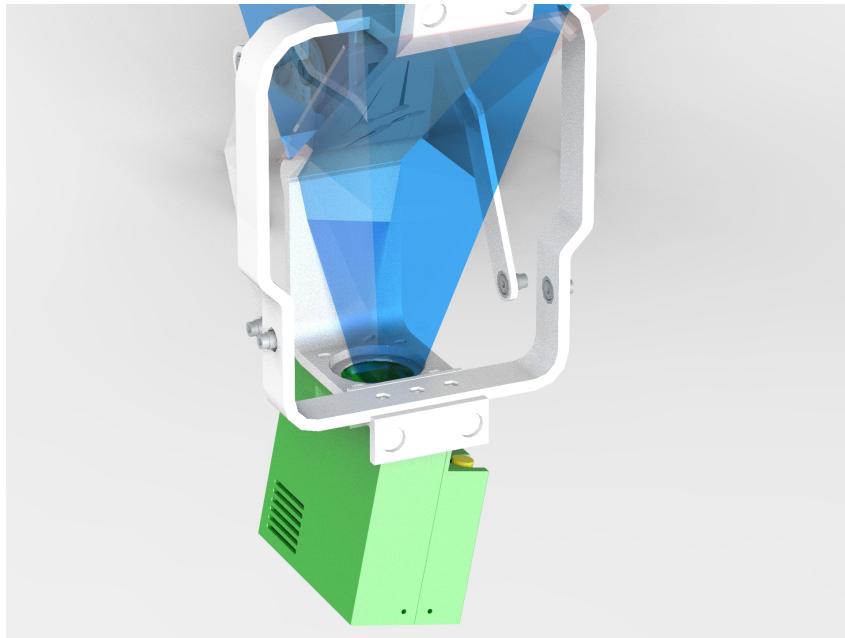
Projector assembly mounted to head showing projection without wide-angle lens
